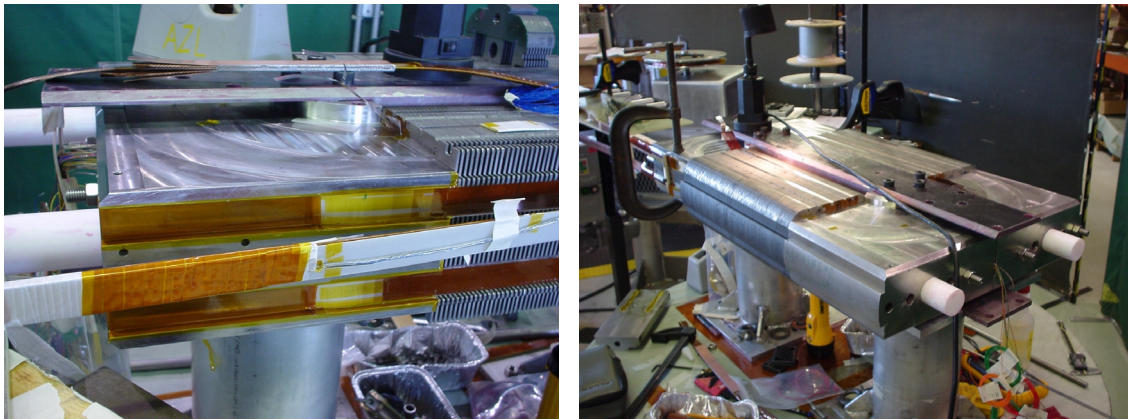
a) Insulated splice and grow, b) Final view after last turn packaging.
